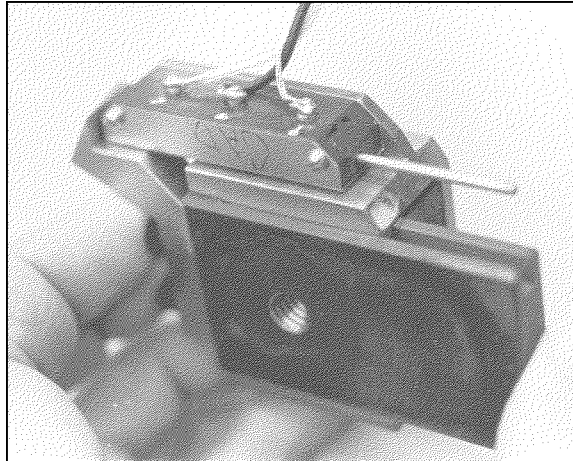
Half of the sliding knee transducer assembly that holds the optional linear potentiometer
